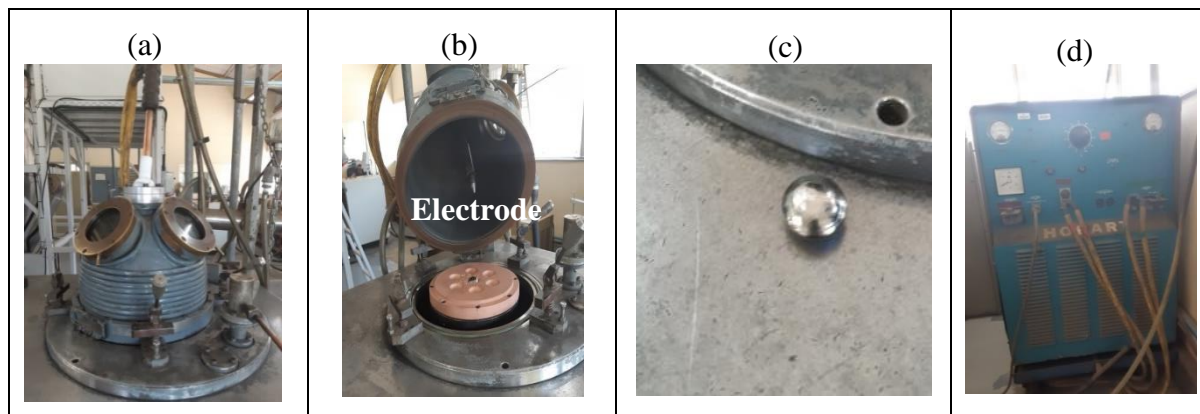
Photographs of the button arc-melting furnace showing (a) melting furnace, (b) electrode copper (Cu) crucible, oxygen getter, (c) example of the produced alloy button and (d) 240 volts Transformer.
